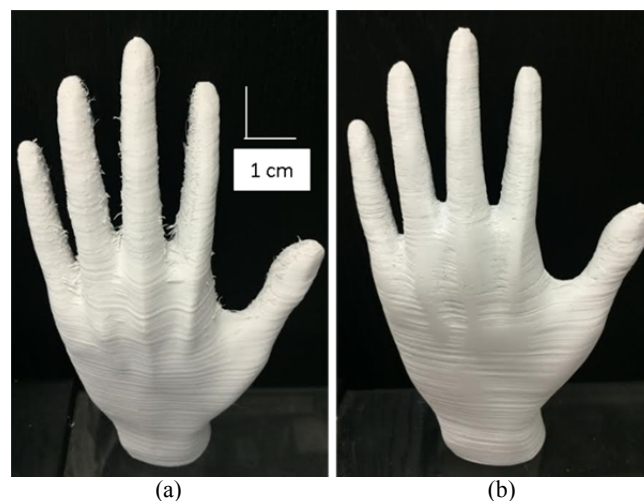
FDM 3D printed samples simulating the left hand with a free-form surface ((a): The sample immediately after FDM 3D printing, (b): The sample printed utilizing FDM 3D printer and processed utilizing the polishing process)
